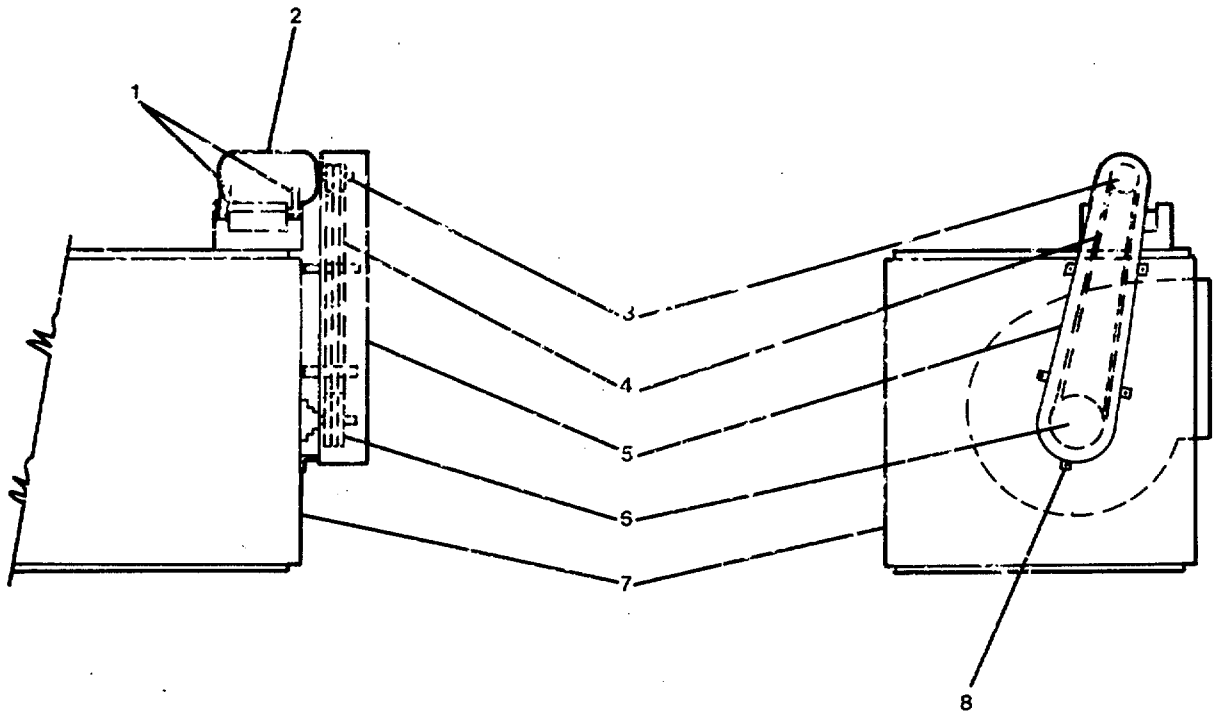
Motor and V-Belt Assembly (A/C #2).
